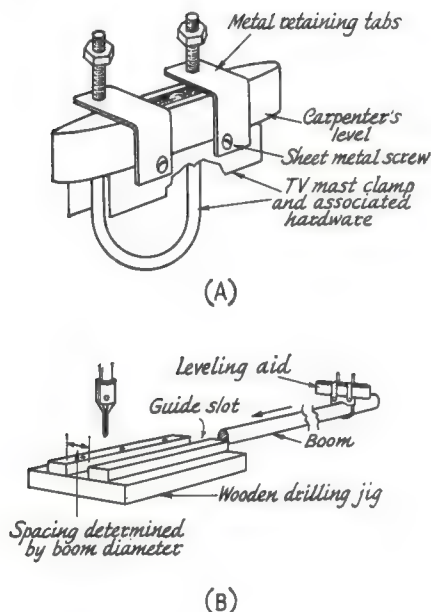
A method of drilling accurate holes in metallic tubing on a drill press. After clamping the wood jig central on the drill-press table, the tubing is held in a position that keeps the level bubble centered. (W5UQR)
